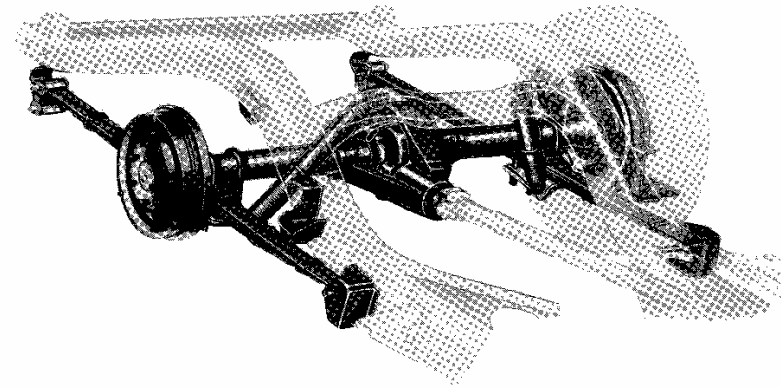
The Hotchkiss rear suspension. (Photo courtesy of Ford Motor Company.)
